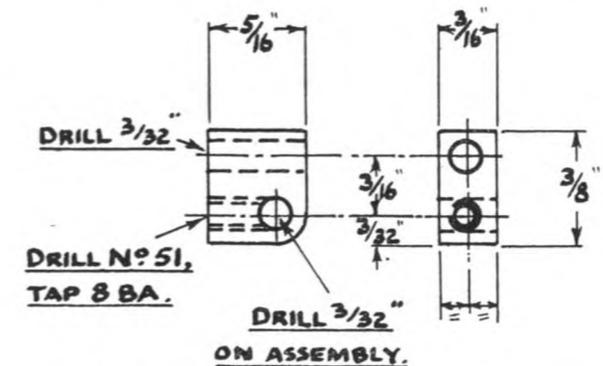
Crosshead. (Shown finished but the cross-head pin hole is not drilled at this stage).
